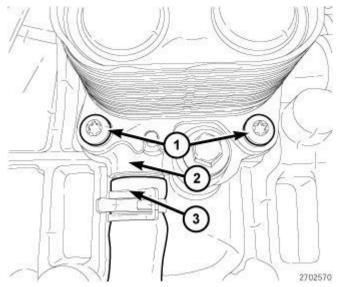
Oil Filter Housing Adapter & Bolts Courtesy of CHRYSLER LLC
